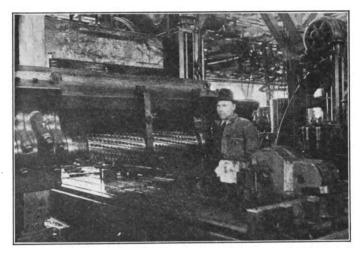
Horizontal miller, machining locomotive connecting rods.
